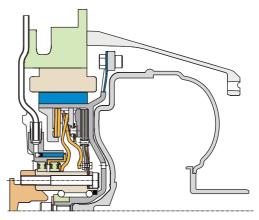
Separating clutch between crankshaft and electric motor with light side of clutch on crankshaft
